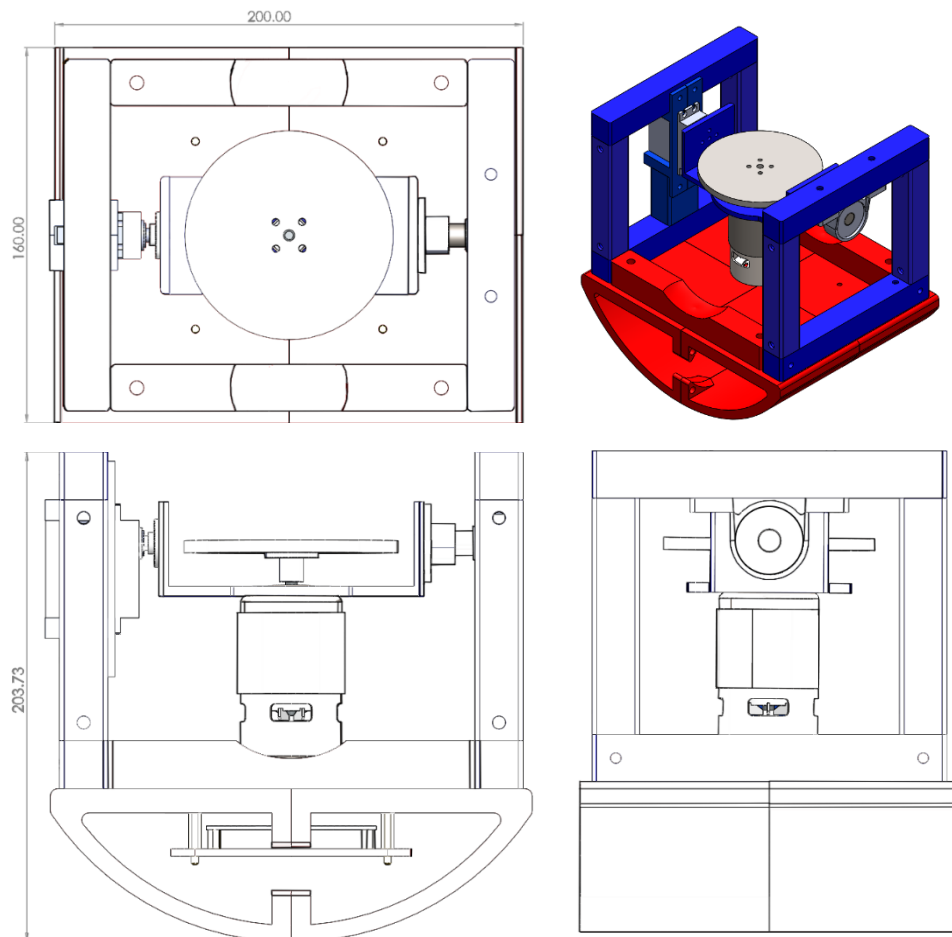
Gyrostabilizer Design Drawing with Top View, Isometric View, Side View and Front
